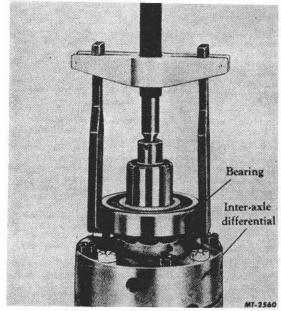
Removing Front Bearing From Inter-Axle Differential.
